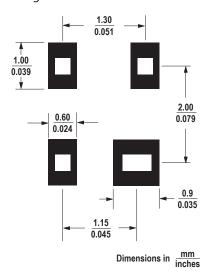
Recommended PCB Pad Layout for Avago's SC70 4L/SOT-343 Products.
